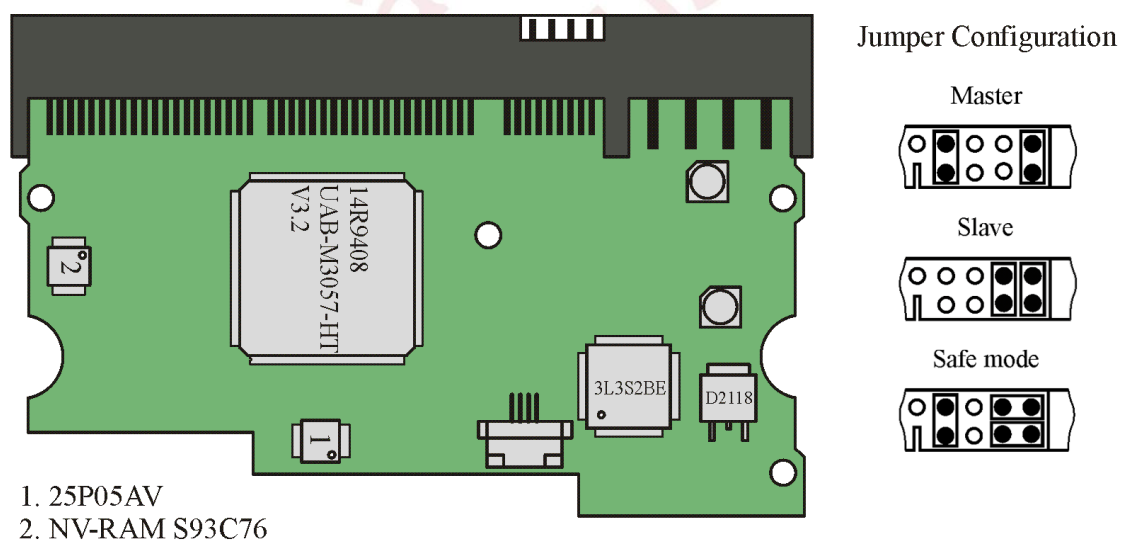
External view of the controller board in T7K250, DLAT drive family.
